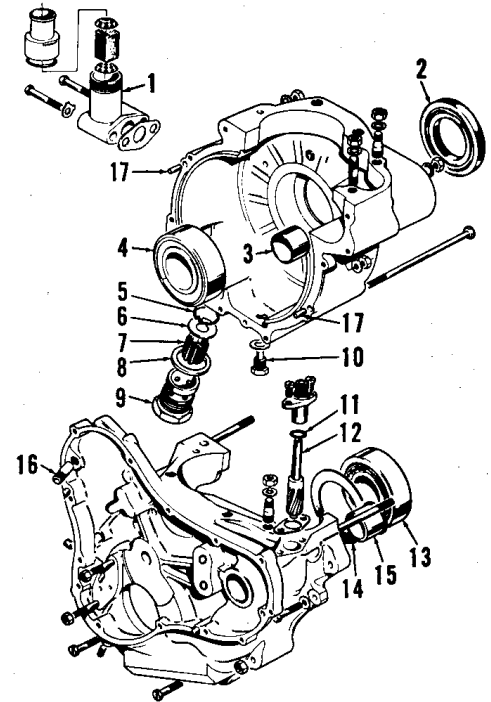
Exploded view of crankcase assembly. Breather (1) is used on 1972 & 1973 750cc models. Breather tube (16) is used on all 850cc models.
